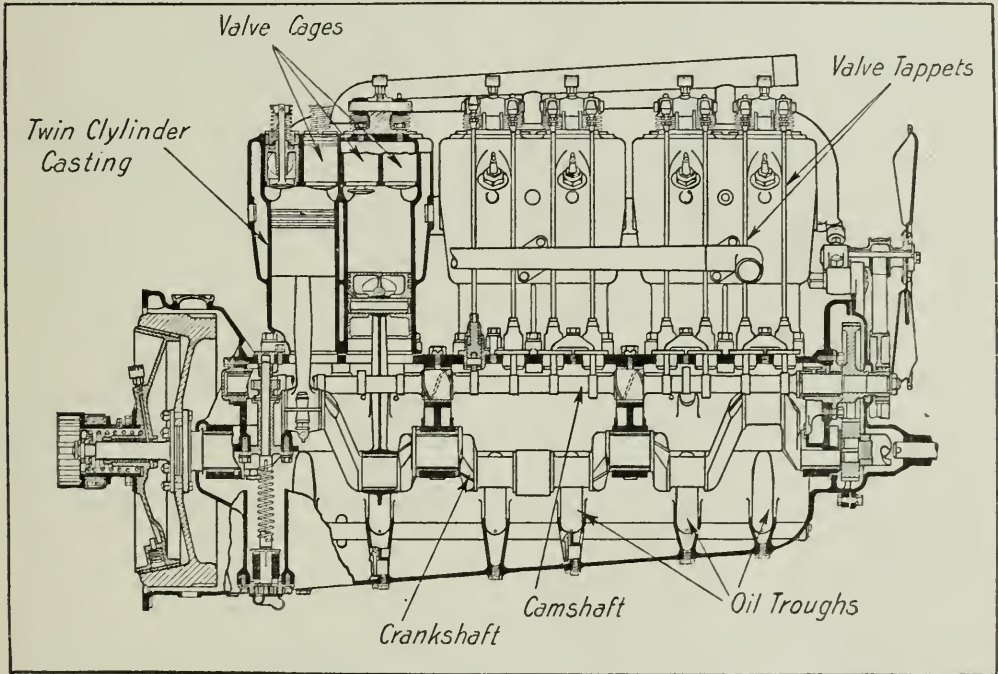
A part sectional view of Buick Motor, showing method of valve mounting in easily removable valve cages
